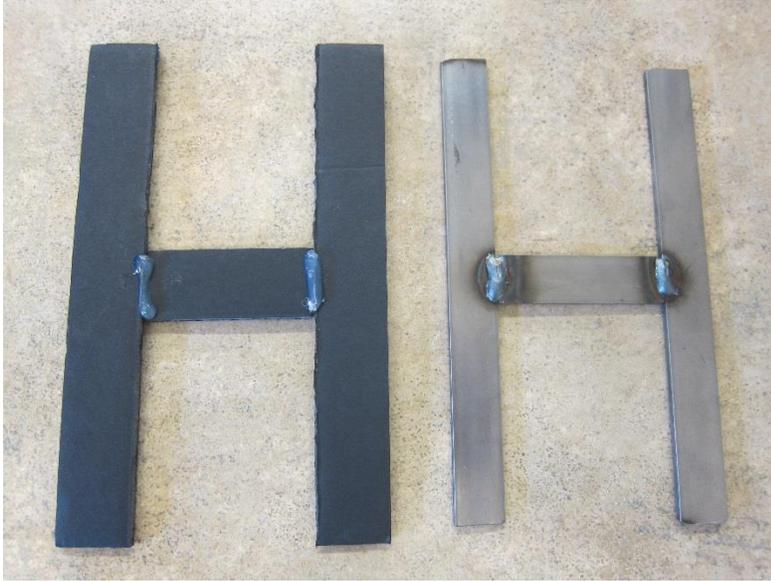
PROTOTYPE AND WELD EXAMPLE
